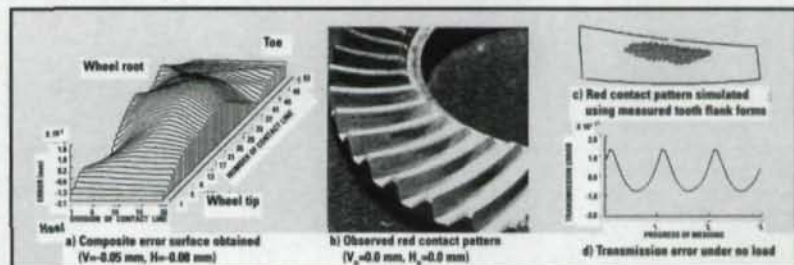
Composite error surface and red contact pattern for initial gear flank.
